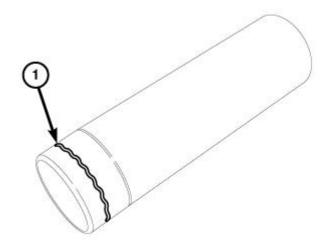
Applying Stud & Bearing Mount Bead To Spark Plug Tube Courtesy of CHRYSLER GROUP, LLC
